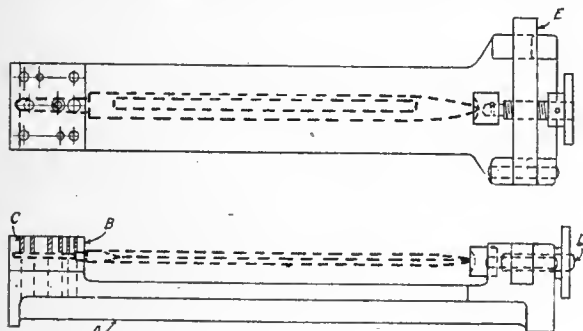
DRILL JIG FOR HOLES IN TONGUE.
